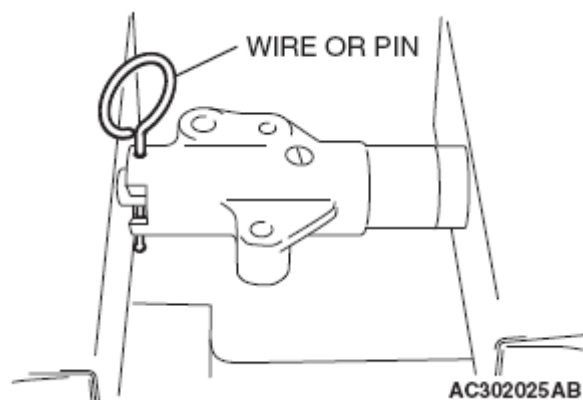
Inserting Wire Or Pin In Set Hole Aligned
